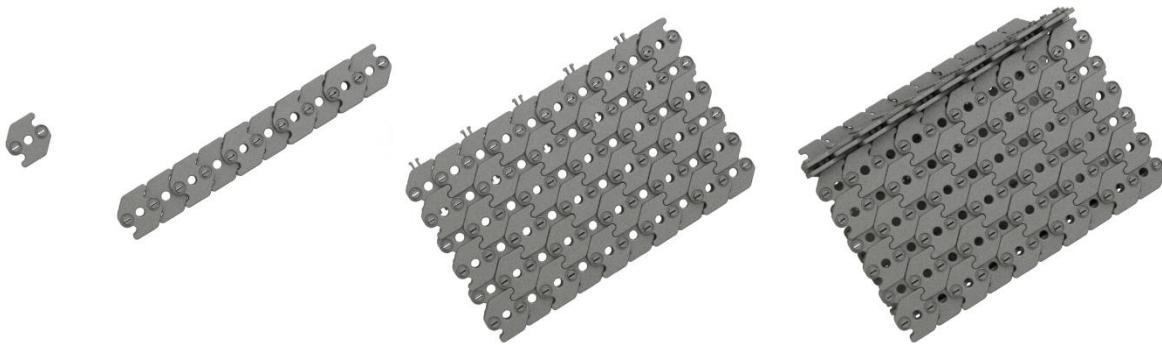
0-Dimensional part assembled into a 1D chain, then a 2D sheet, then a 3D channel.
